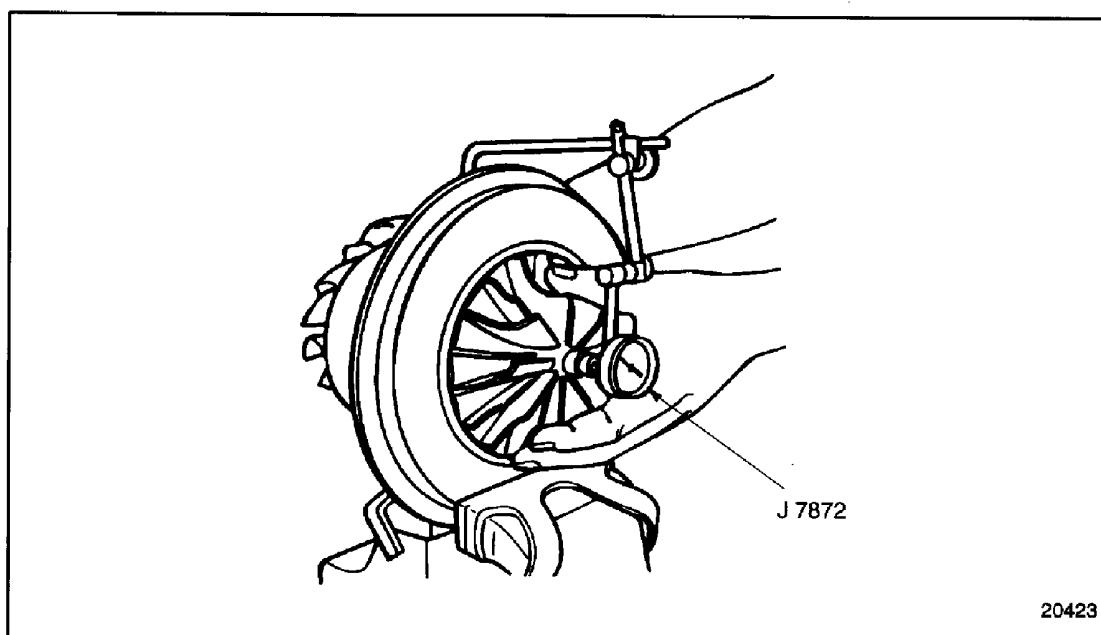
Checking Bearing Axial End Play (Series 50 Diesel)
